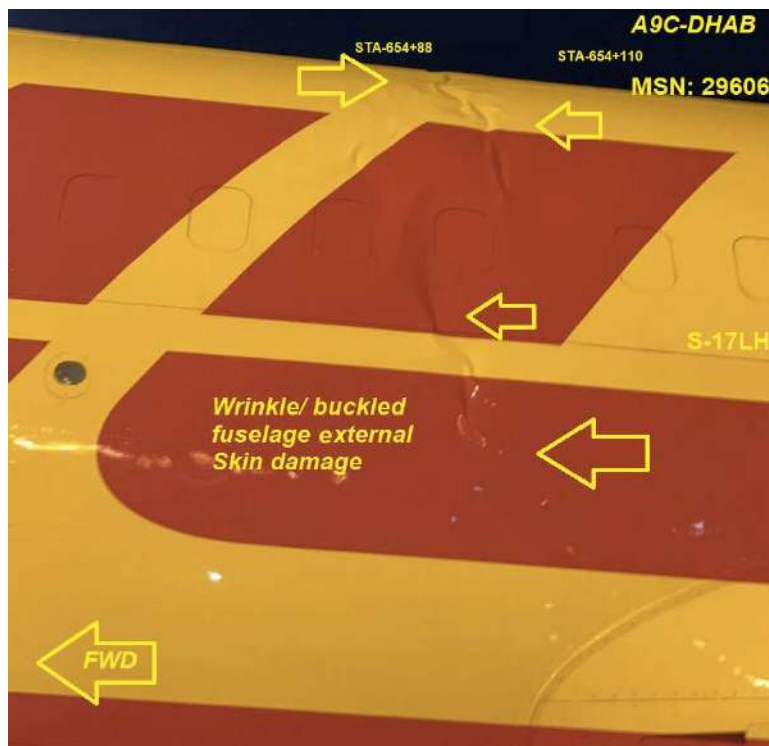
Wrinkle/buckled fuselage external Skin damage LH side enlarged view
